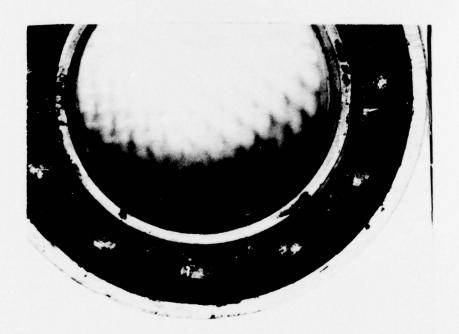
Bearing S/N TRL-38. 2.5x Enlarged View.
